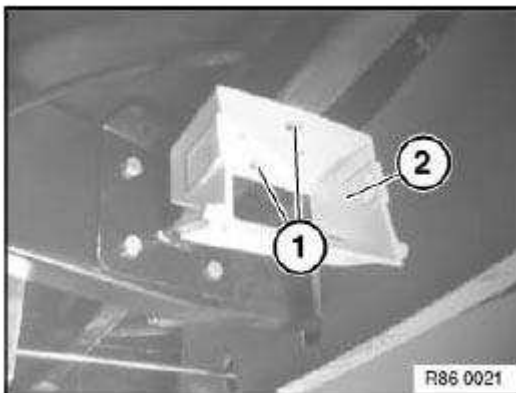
Identifying Cheese Head Tapping Screws On Holder
